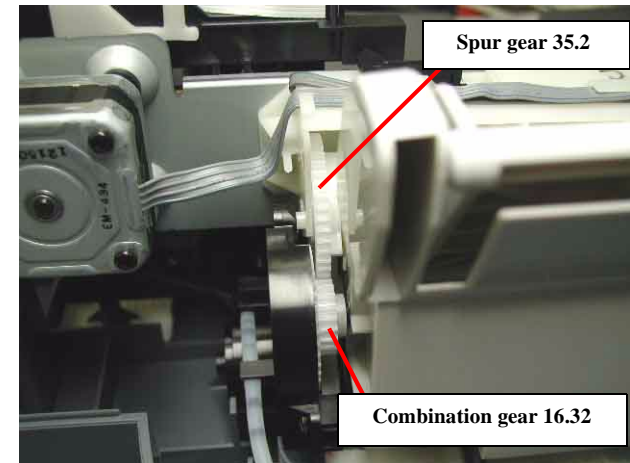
Spur Gear 35.2 and Combination gear 16.32
